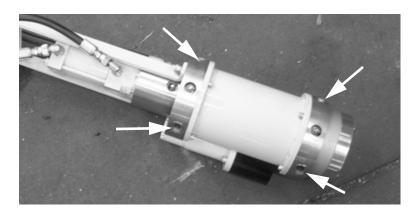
There are three holes for clamping legs on each flange of the cutting machine.
